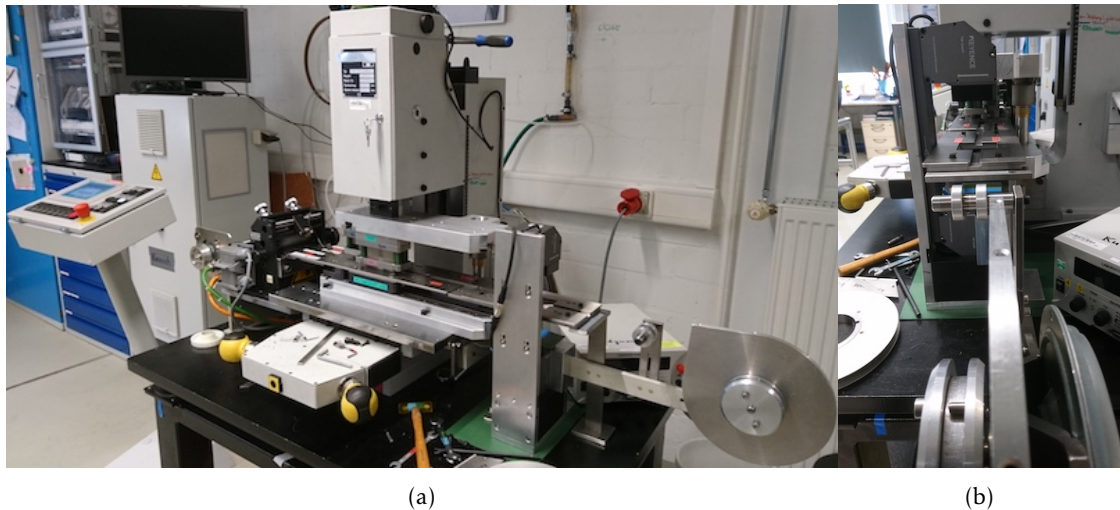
An overview of the punching machine used to cut the tapes through the punching method. Images courtesy from Drs. Wescley de Sousa and Anna Kario, ITEP/KIT: (a) The real-to-real punching machine used; (b) Lateral view of the punching machine.
